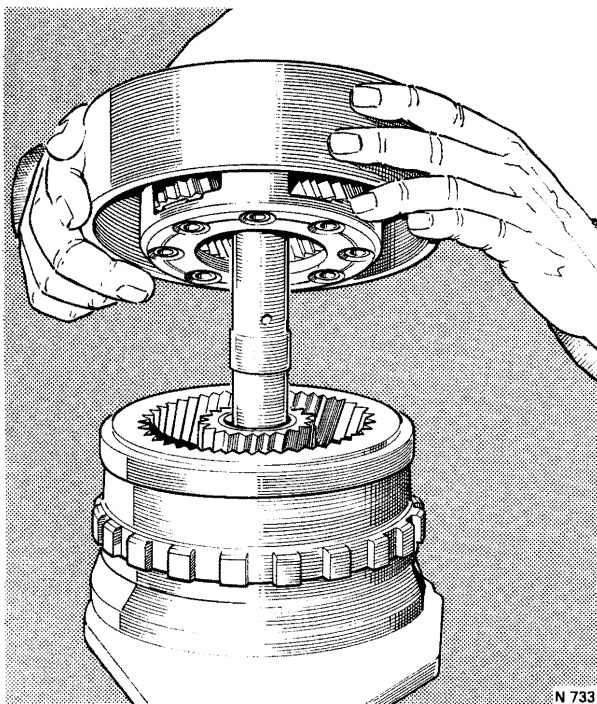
FITTING THE REACTION CARRIER TO THE OUTPUT CARRIER
